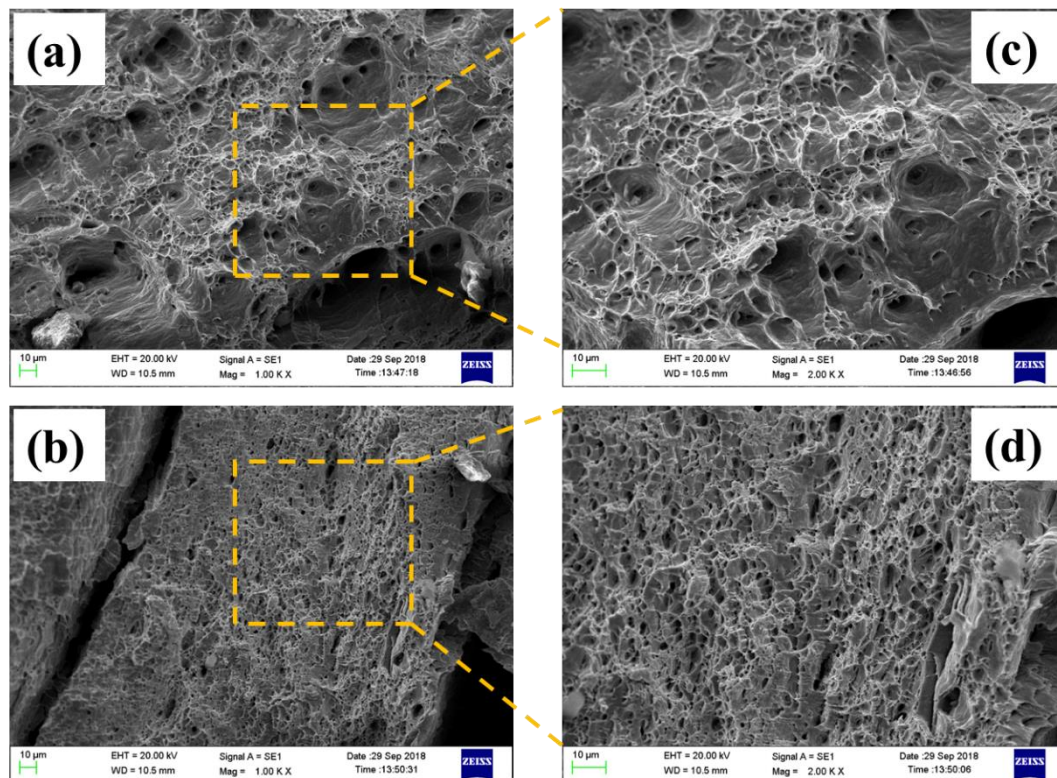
Fractographic surfaces of the transverse tensile sample of (a,b) base metal and (c,d) welded plate S7.
